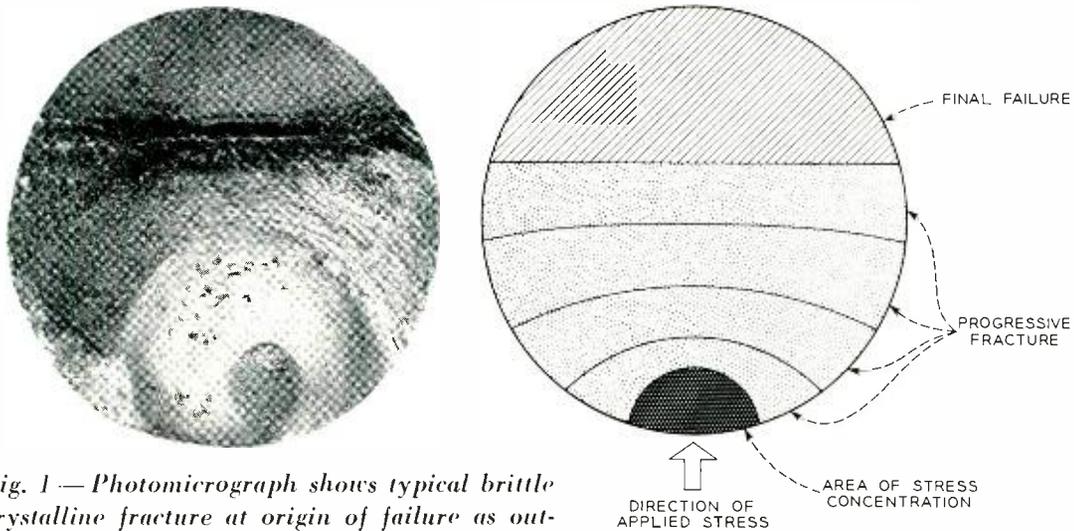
Photomicrograph shows typical brittle crystalline fracture at origin of failure as outlined in cross section drawing at the right.
